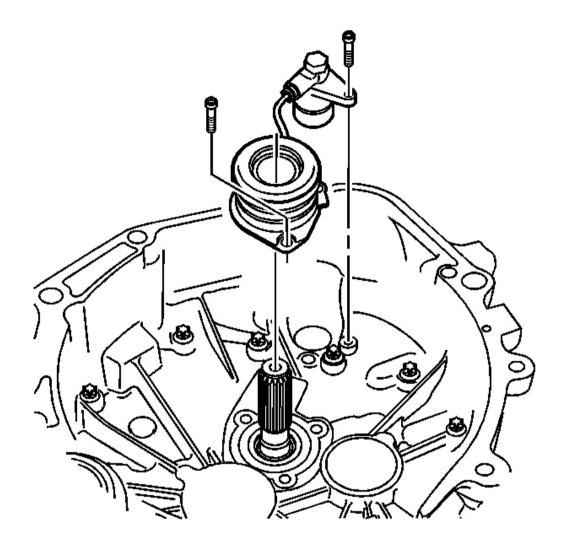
View Of Actuator And Tube Courtesy of GENERAL MOTORS CORP.
